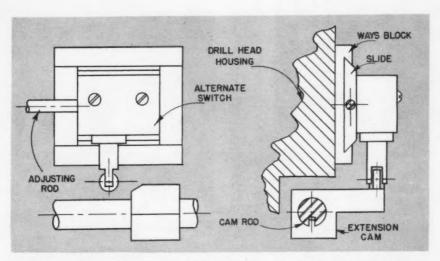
A sketch showing the modification which was required to the basic drill unit.
